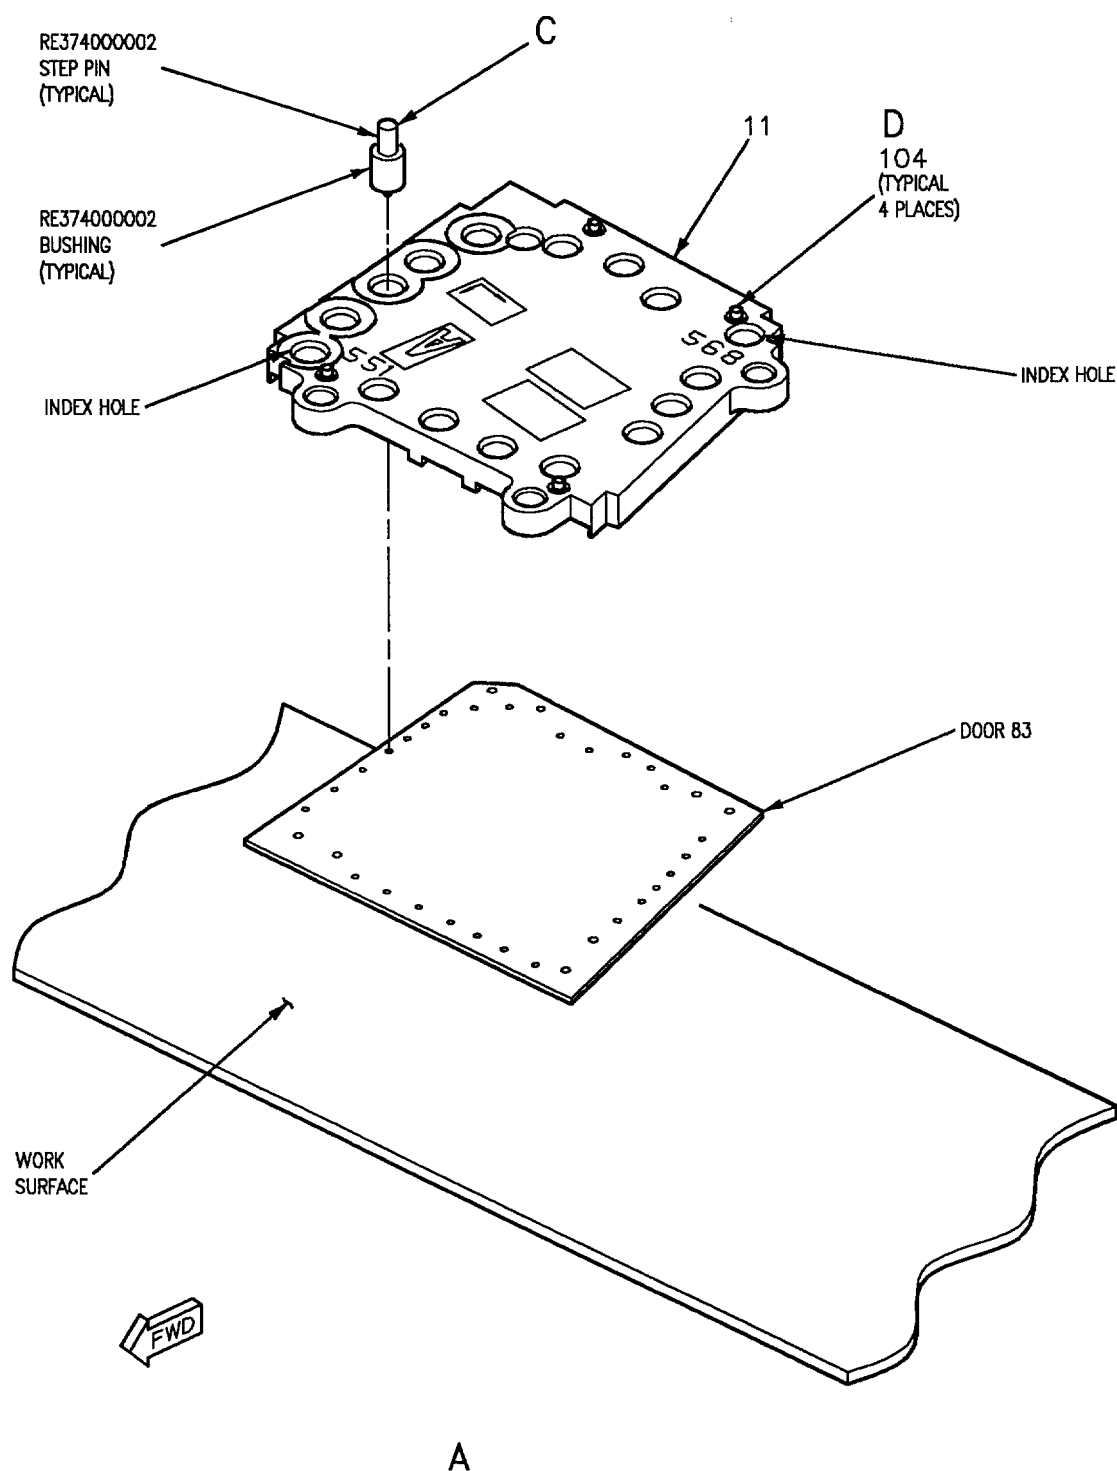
Installation of Plate Set for Drilling Door 83 Substructure (Sheet 1)
